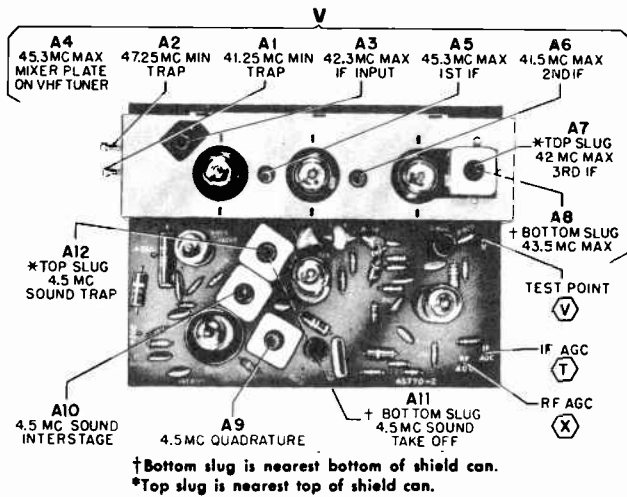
Inside Chassis View of Printed Wiring Board Showing Test Point Locations and IF Alignment Data.
